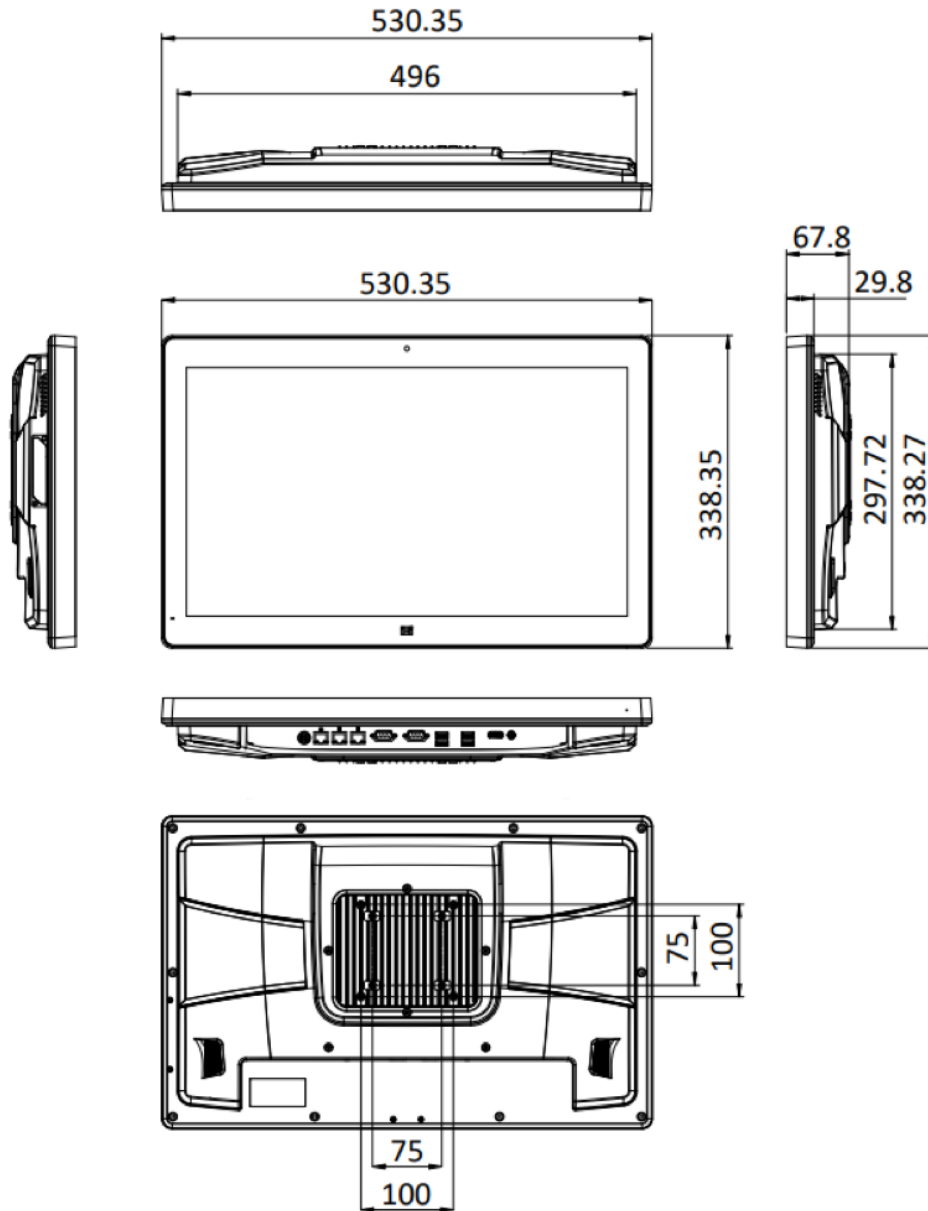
AFL3-W22C-ADLP Dimensions (mm)
